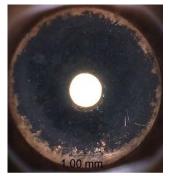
Contact tip after a 5 minute welding test with wire as shown in photo 5
